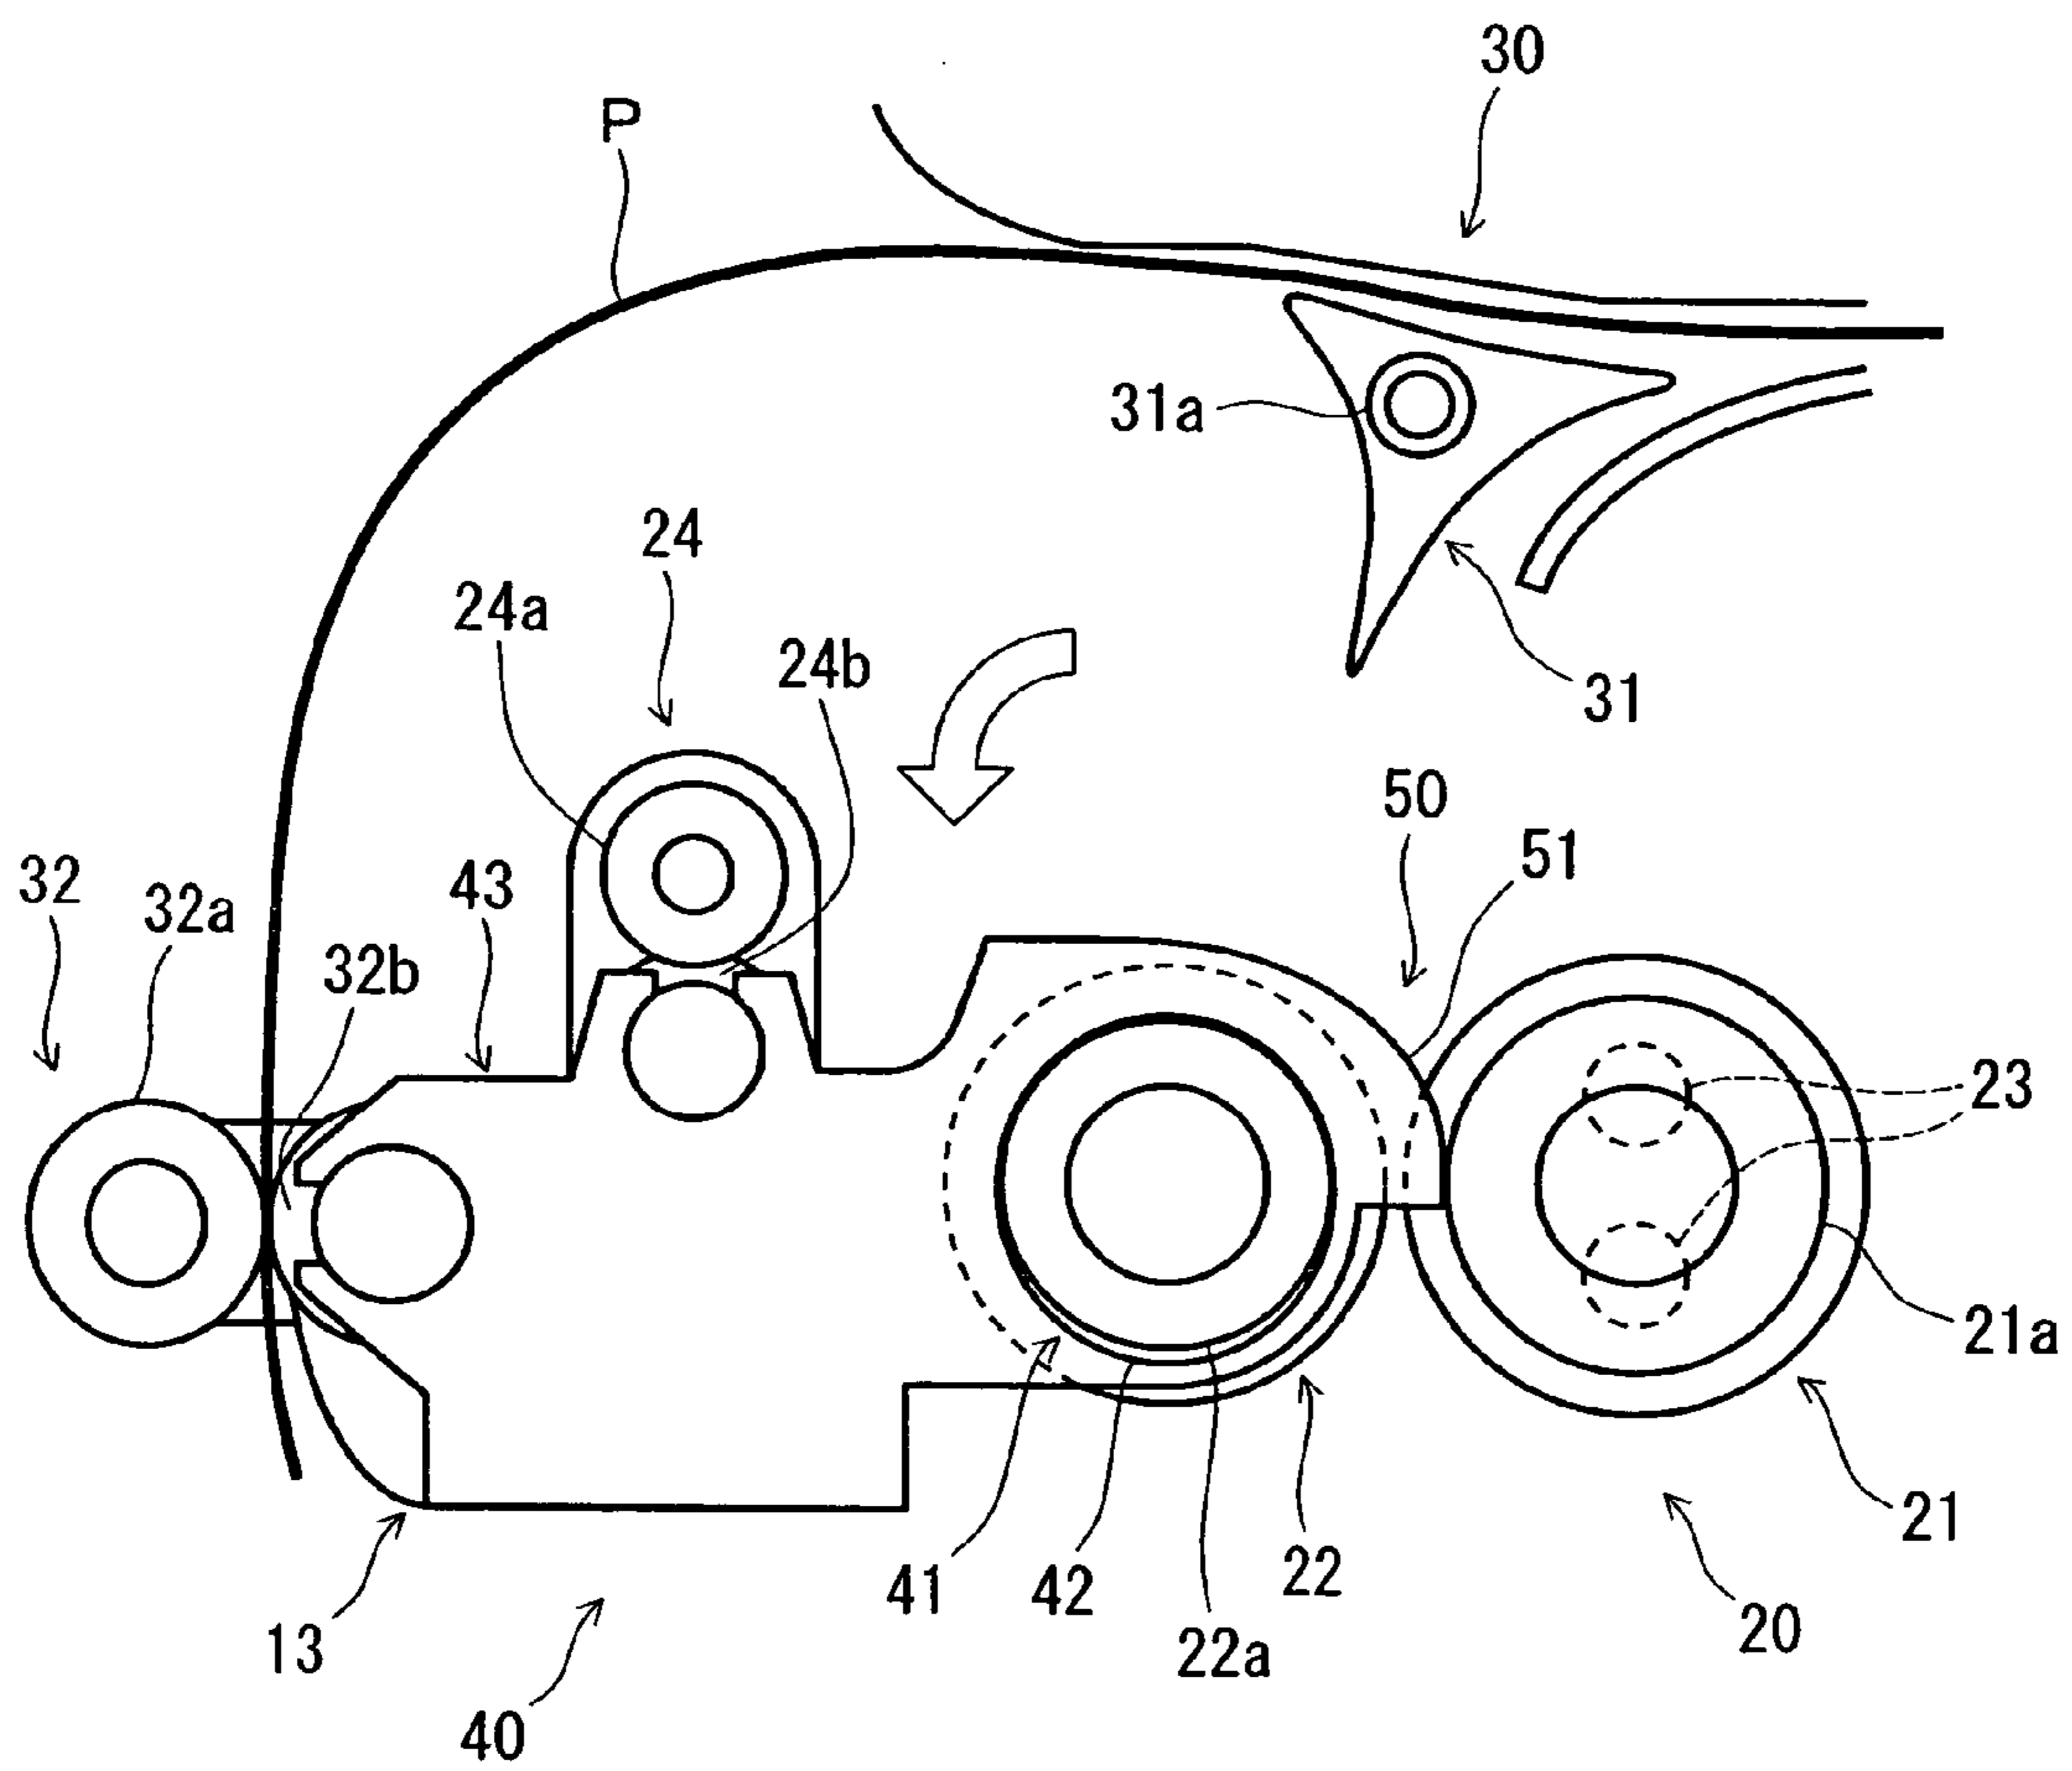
IMAGE FORMING APPARATUS INCLUDING AN OPENABLE SECTION AND SEPARATING MECHANISM WITH CAM
